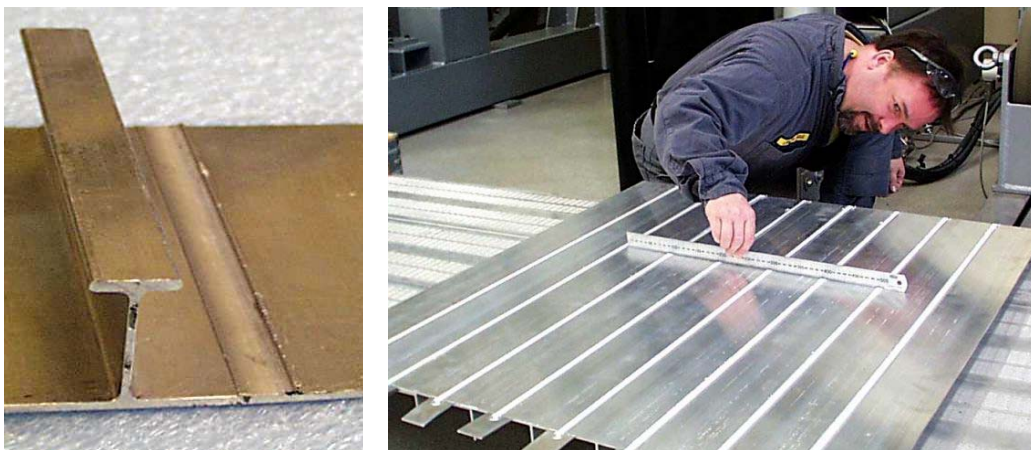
Flat panel field after welding. Instead of using wide profiles, the panel is made from relatively narrow (120 mm) extrusions. ©ESAB
